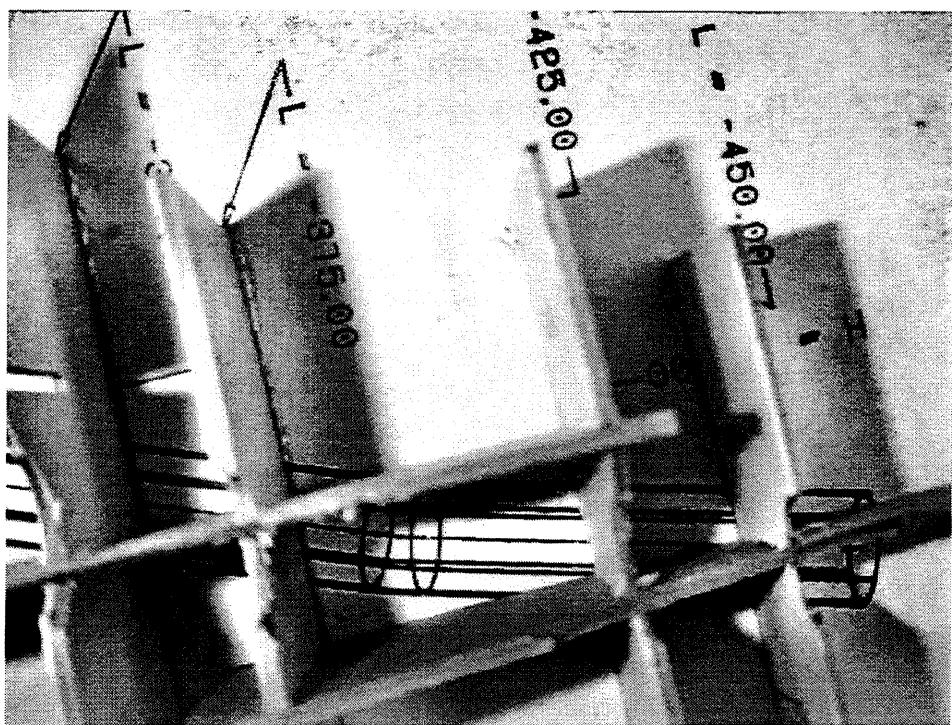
This figure shows the top view of the cardboard sections assembled together to form the grid. The part geometry is printed on the fixture base.
